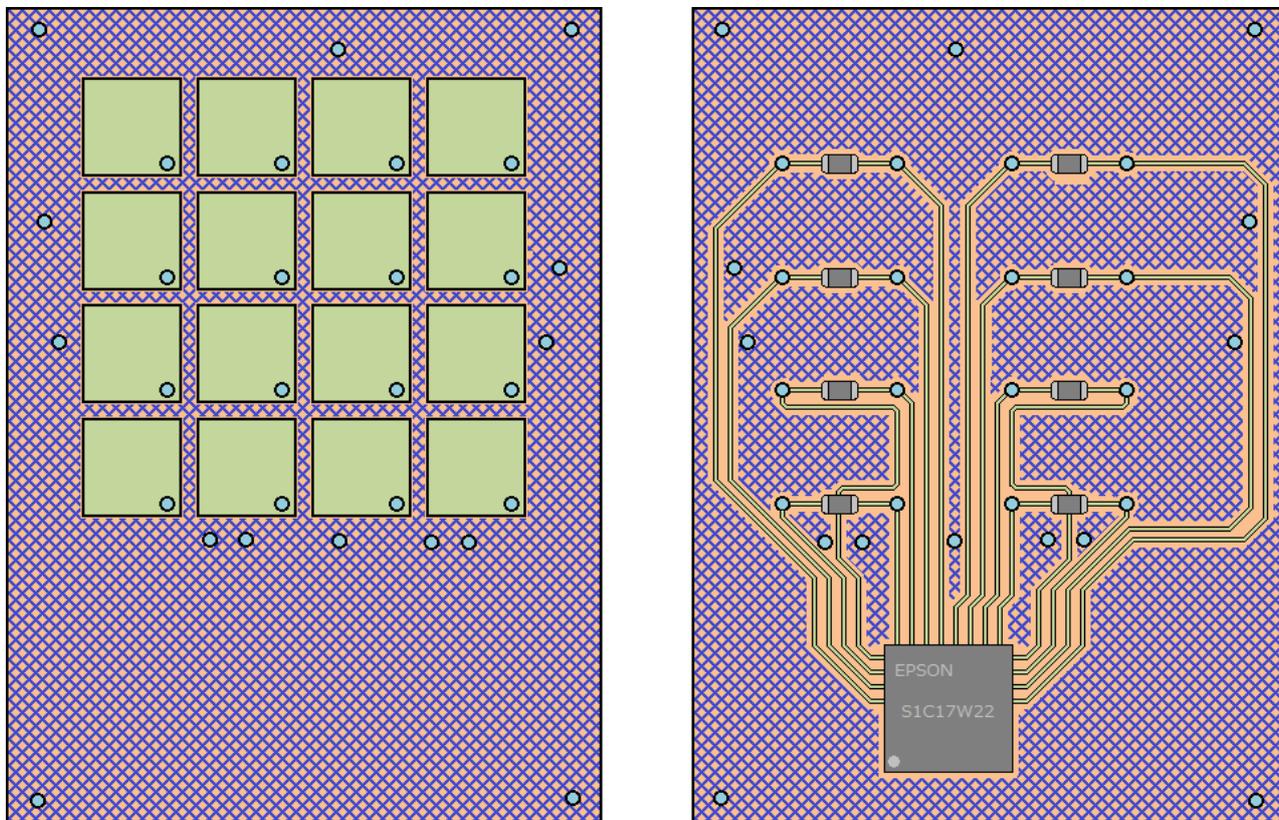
Touch Key Print Circuit Board Pattern Image (Front and Back)
